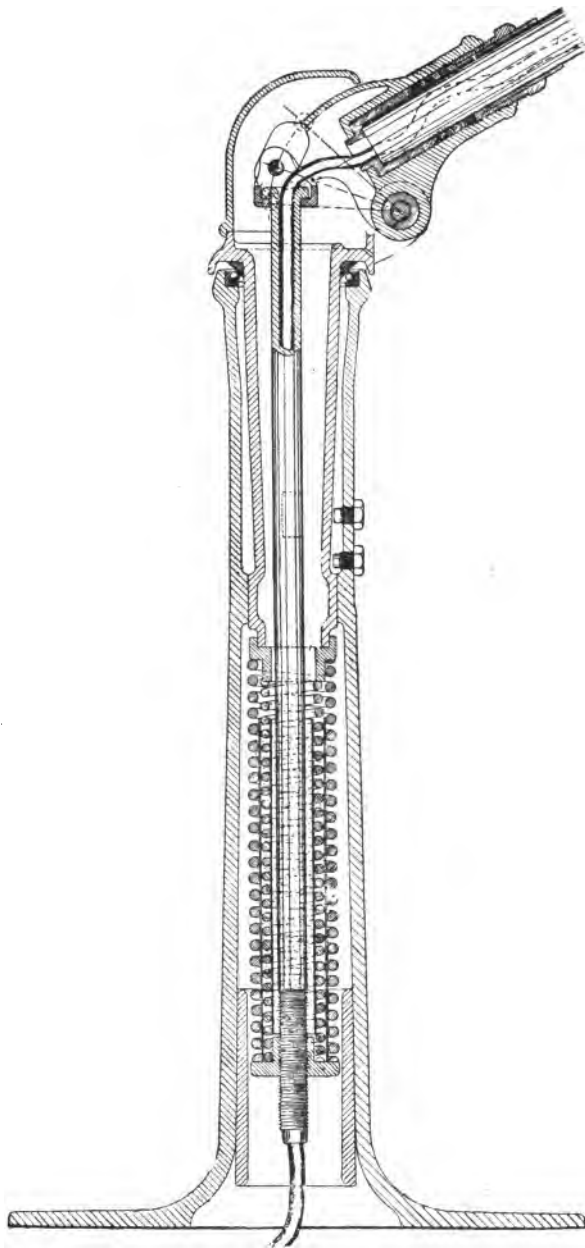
SECTIONAL VIEW OF TROLLEY MAST FOR DOUBLE-DECK CAR.
